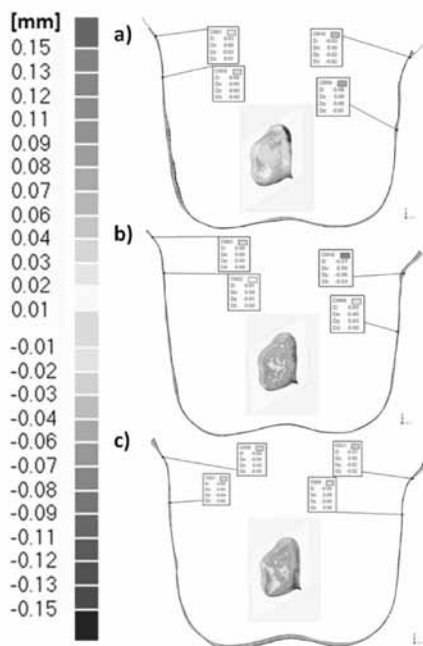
Distribution of reconstruction accuracy deviations for the step shape in the frontal plane cross-section, for the premolar tooth, formed using the following technologies: a) casting, b) milling, c) SLM
